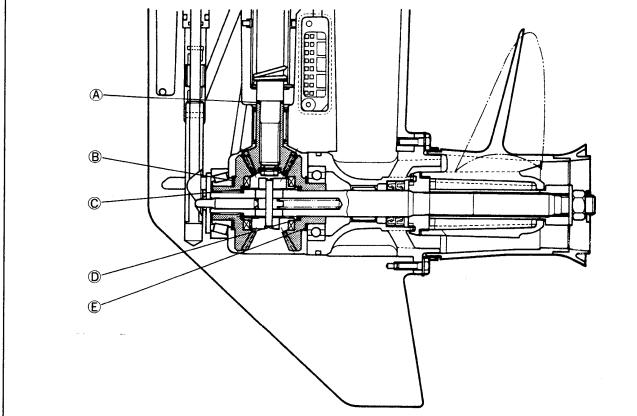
To measure the backlash, hold the driveshaft steady and move the forward gear back and forth
